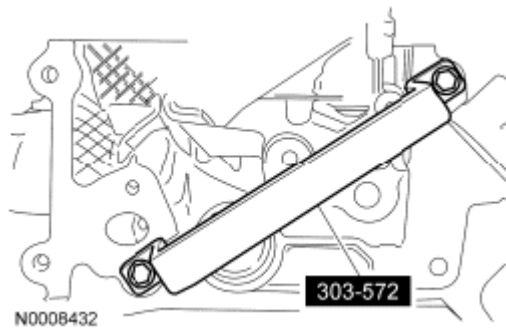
Identifying Cylinder Head Remover/Installer (303-572)
